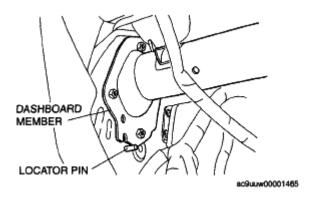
Identifying Dashboard Member & Locator Pin Courtesy of MAZDA MOTORS CORP.
